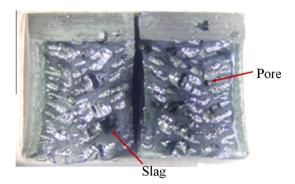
Porosity on the fracture surface of the Charpy specimen for a 6 mm grinding depth and 50 m water depth [9].
